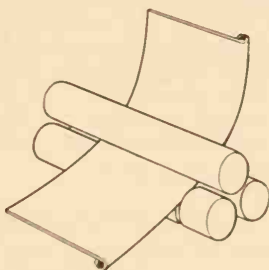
Forming a piece of metal in the rolls with a wired edge.
